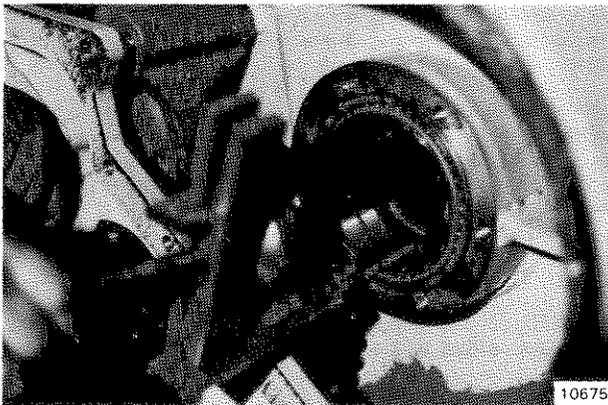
REMOVAL OF THE INTERMEDIATE SHAFT AND DRUM GEAR (Page 1 of 2)
